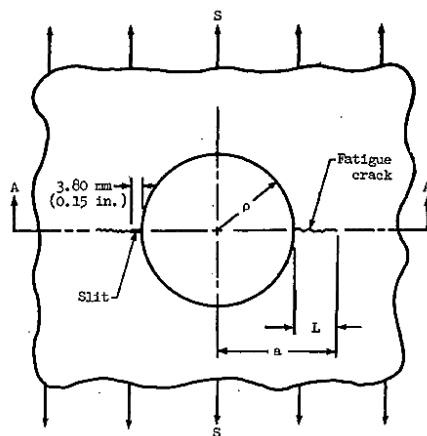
Fatigue crack length reference and saw-cut slit [35]
